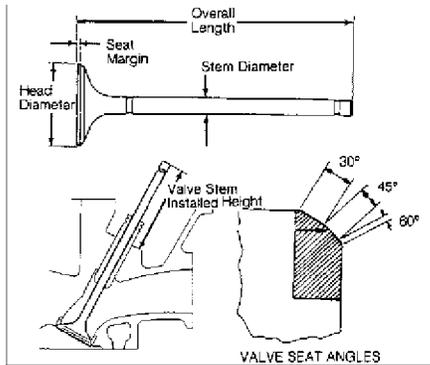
Valve Guide, Valve Seat & Valve Specifications
